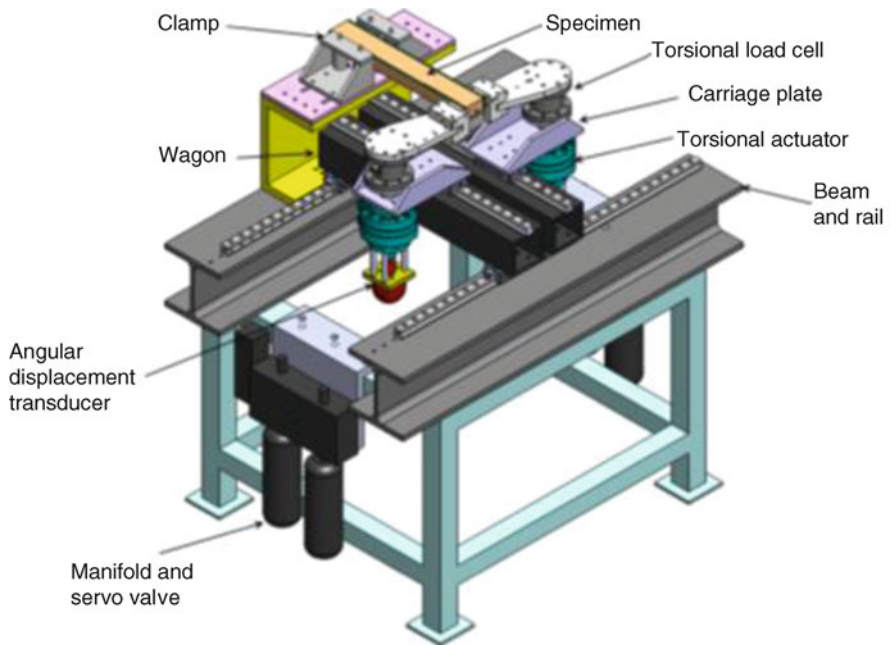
Assembly drawing of the DCB-UBM test rig (isometric view)
